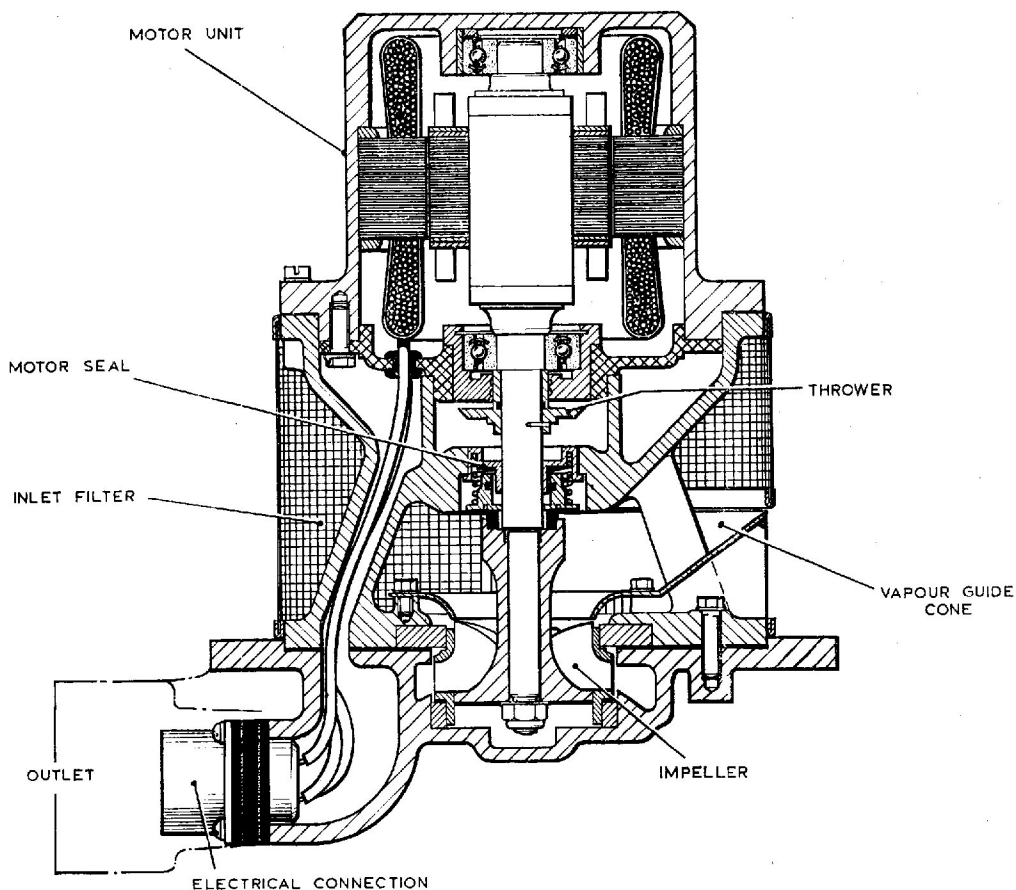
Sectional view of Type PAC. 500 fuel pump
